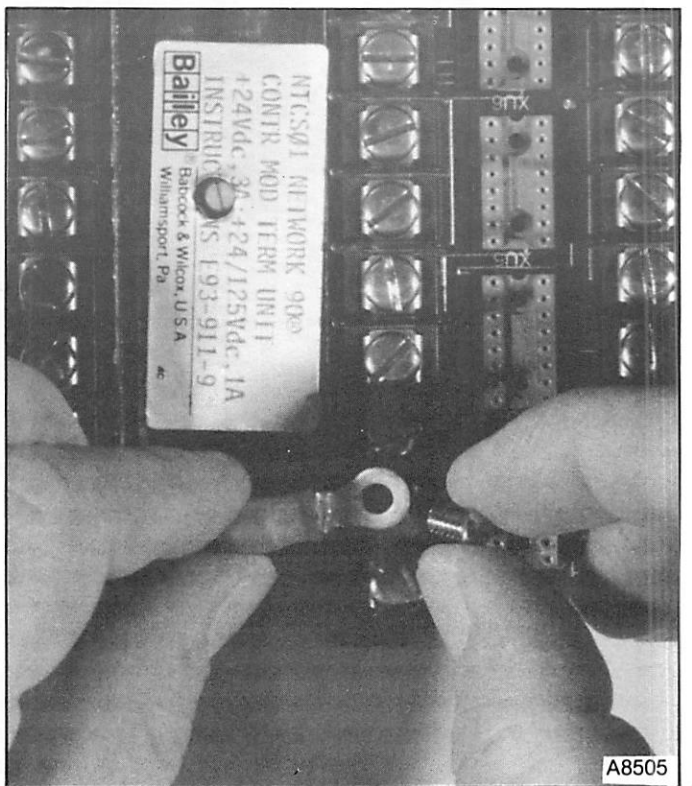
Attaching Process Wire to Terminal Blocks
